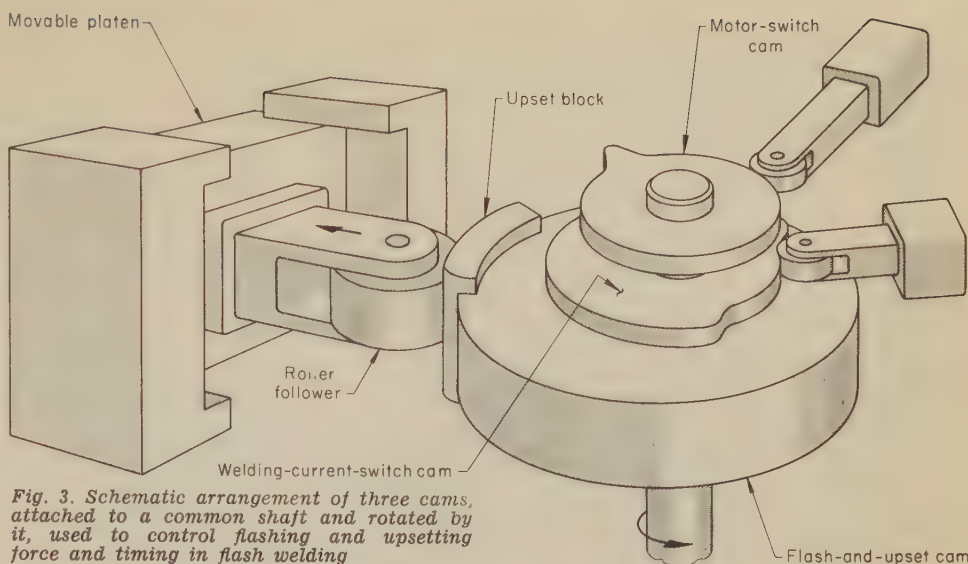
Schematic arrangement of three cams, attached to a common shaft and rotated by it, used to control flashing and upsetting force and timing in flash welding
